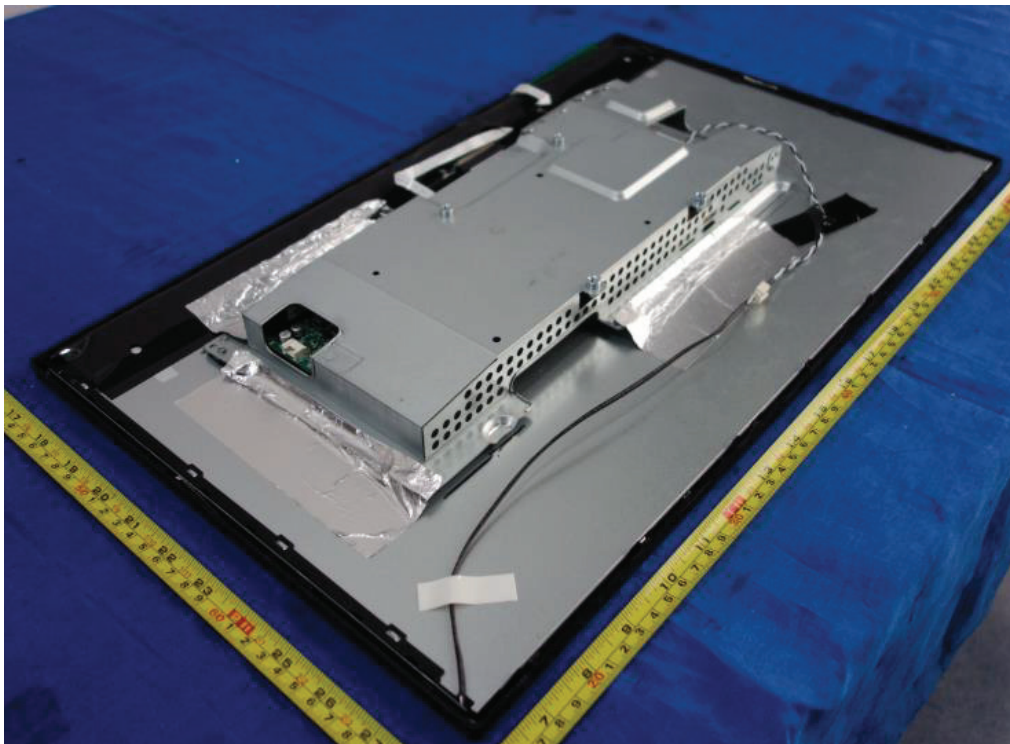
Metal enclosure type C with power board 715G7300 and main board 715G9496
